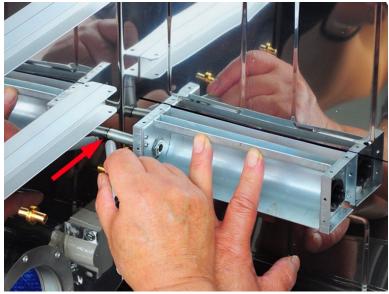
Trace the edge of the mounting tube to mark where the hole should be drilled.
